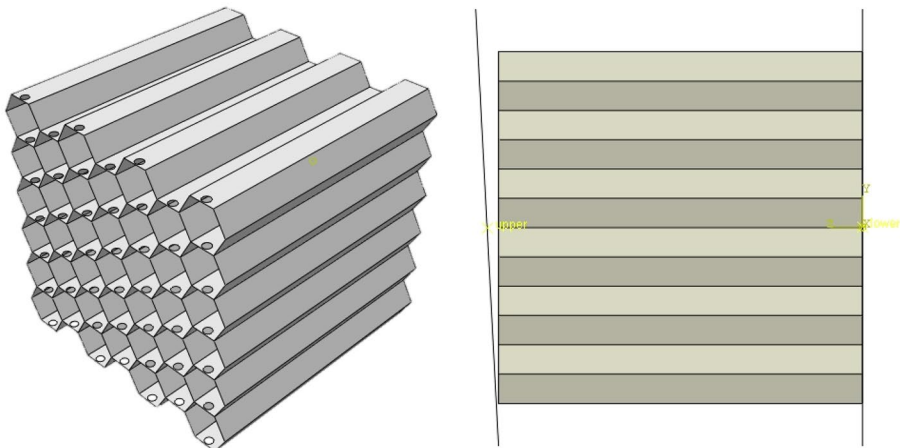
Trigger mechanisms at the top of honeycomb specimens
